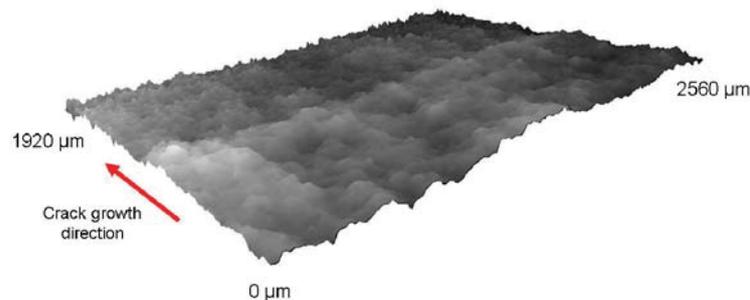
Change in fracture surface topography of a mill-annealed flat specimen,  $R = 0$ ,  $a_0 = 0.4$  mm
